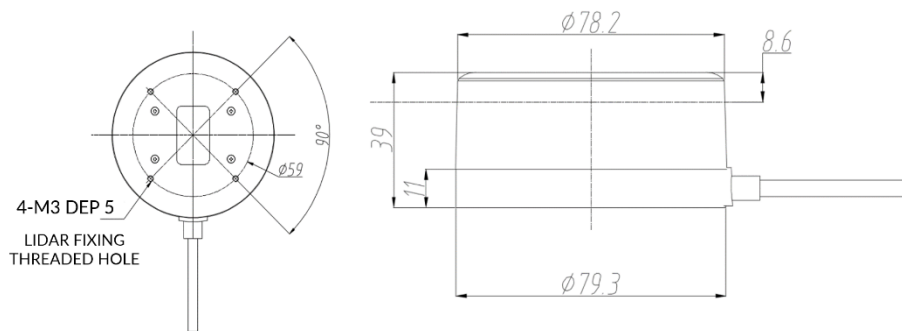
Lidar Mounting and Mechanical Dimensions (unit: mm)
